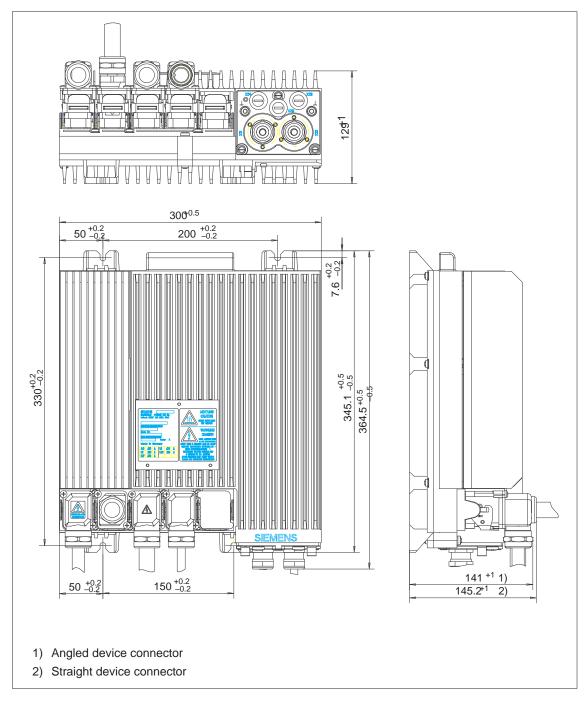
Dimension drawing POSMO CD 9 A, 6SN2 703-2AA0 -0BA1
